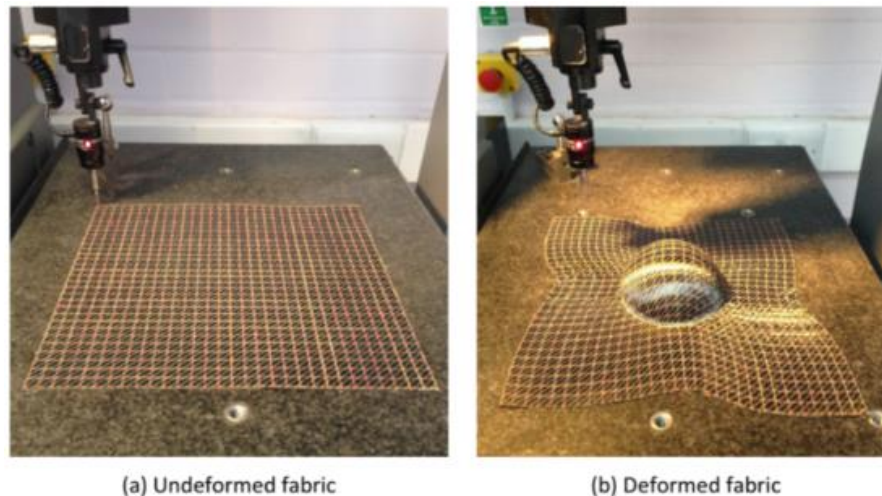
Grid measurement of the undeformed and deform fabric using a coordinate measuring machine [33].
